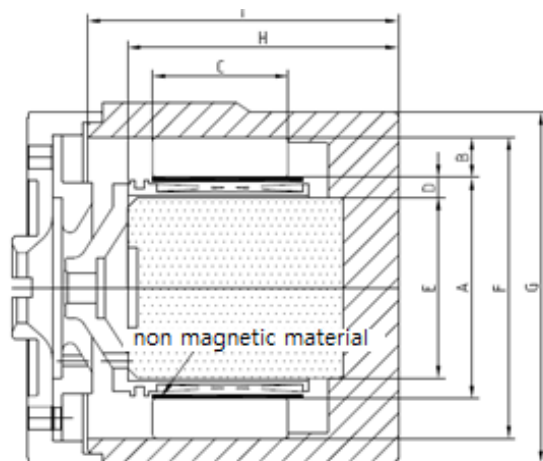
Cross sectional drawing of the voice coil linear force motor in design
